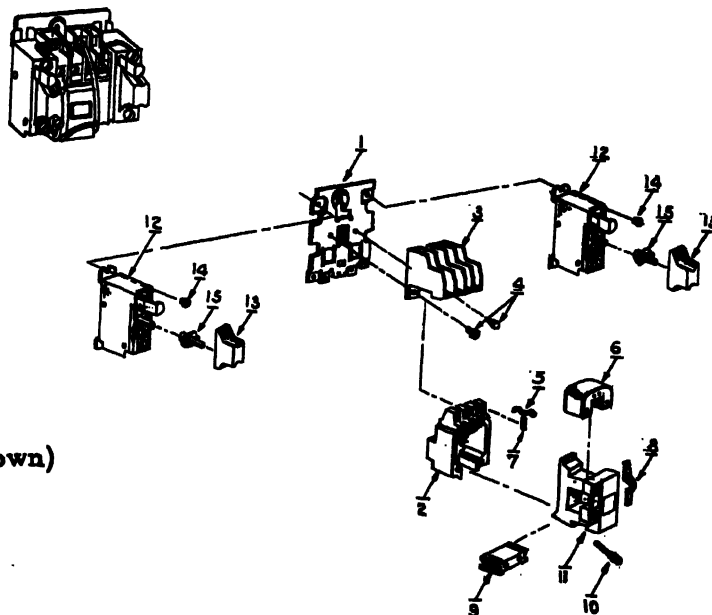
BLOWER STARTER ASSEMBLY AND DISASSEMBLY
